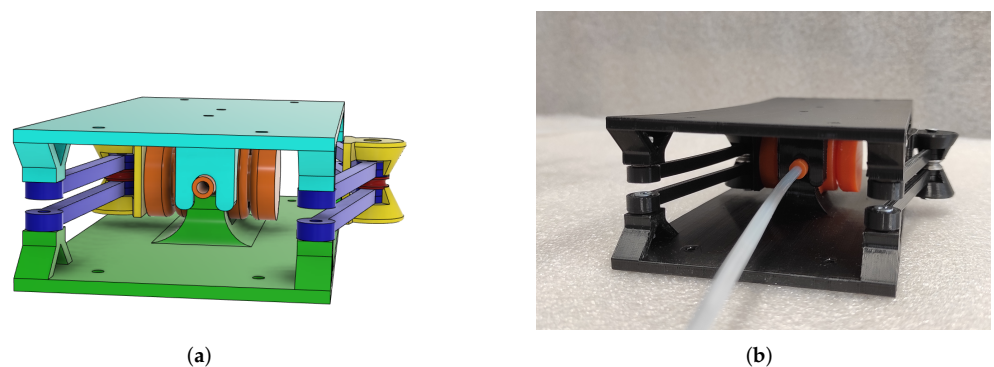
Mechanism assembly. (a) 3D view in Autodesk Fusion 360 CAD-3D software. (b) Real prototype.
